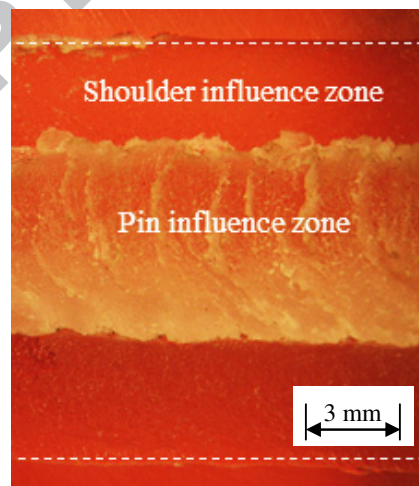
Picture of the surface of a weld produced with tool 1.
